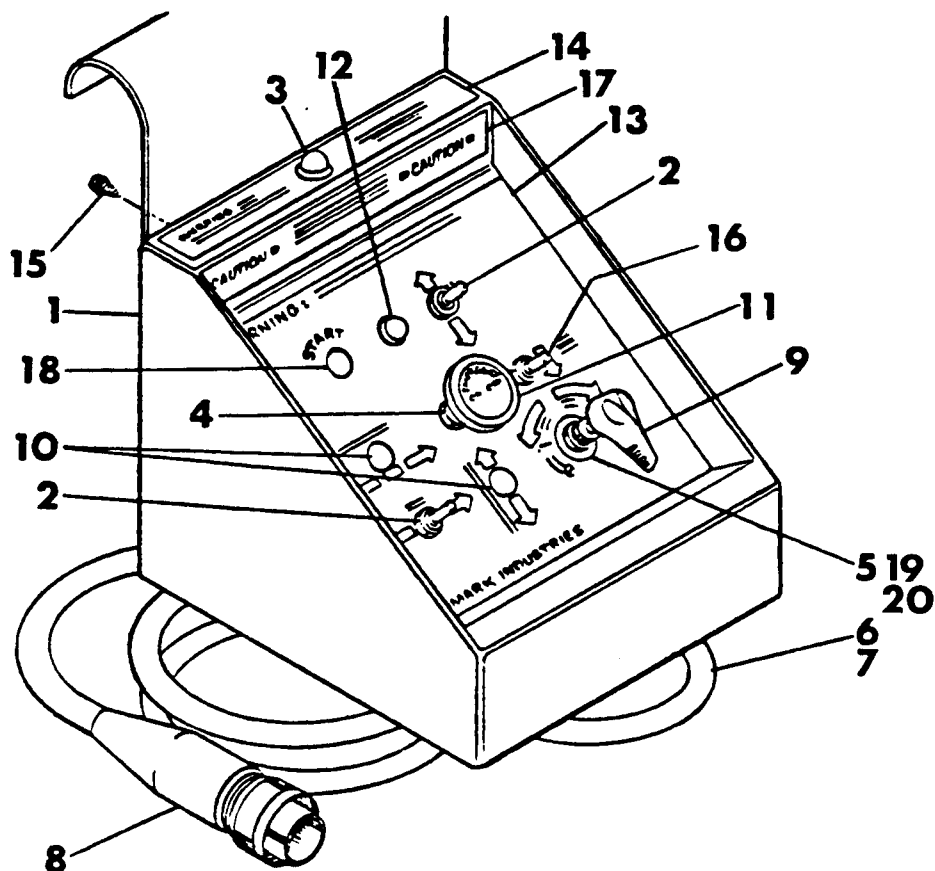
B - DECK ASSEMBLY (RT26E) (RT26G)
